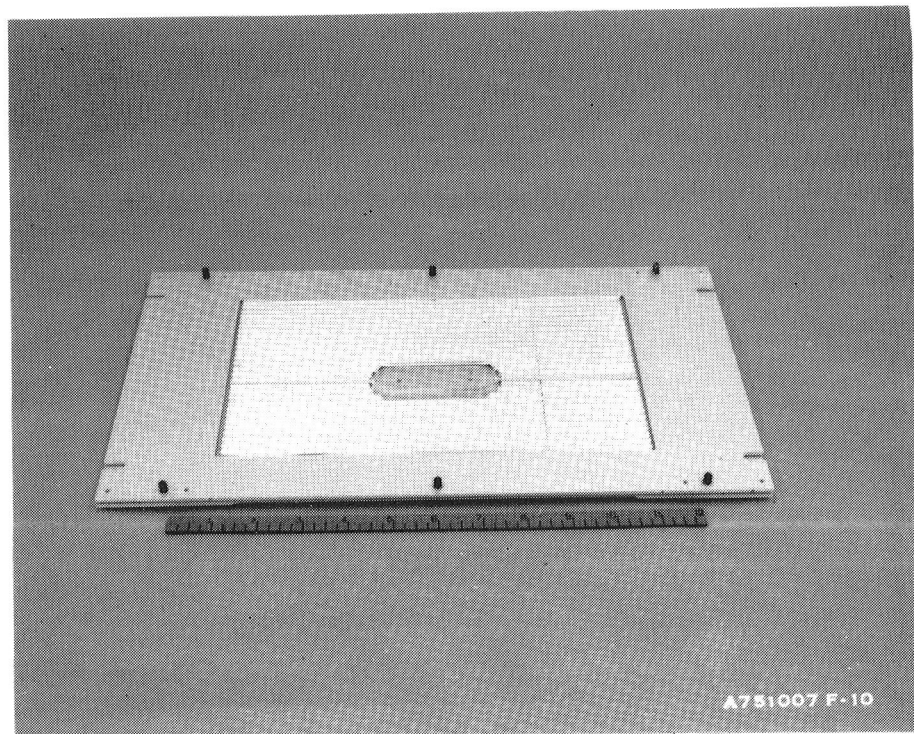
Skin Interior Hardspot Specimen (SIHS)—Internal Details of Panel during Pre-Braze Assembly
